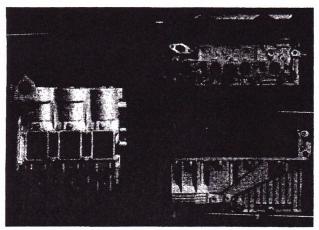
Main castings of the 3-cylinder orbital engine.
